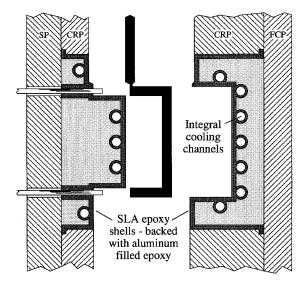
Mold cavity/core insert set constructed with a thin SLA epoxy shell having integral, conventional size, circular cross-section cooling channels. The shell is backed up with a metal filled (epoxy) casting resin.
